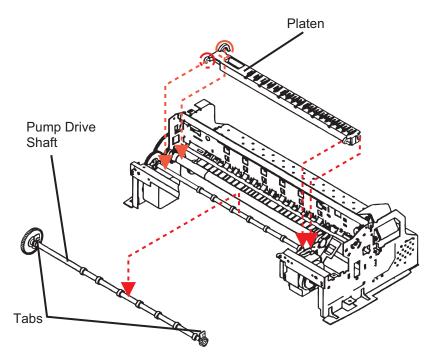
Removing the Platen and Pump Motor Drive Shaft
